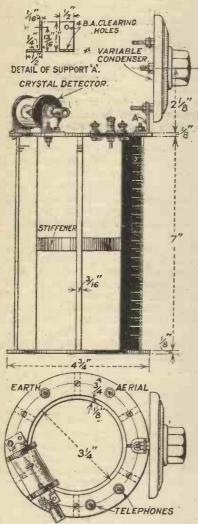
Details of construction of the coil former, and of the upper end ring, upon which the condenser and crystal are mounted.
